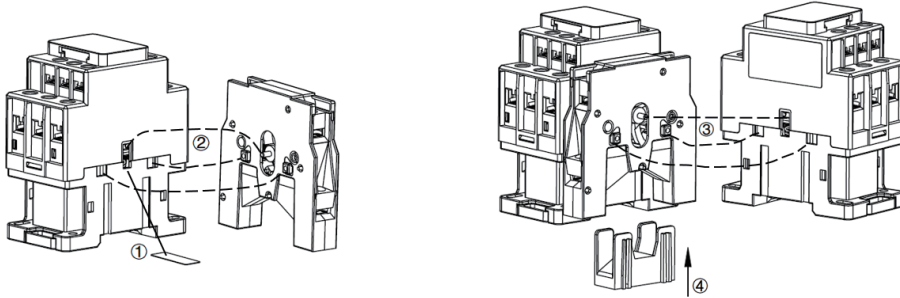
Installation method of mechanical interlock FJ3 and mechanical electrical interlock FJ3e
